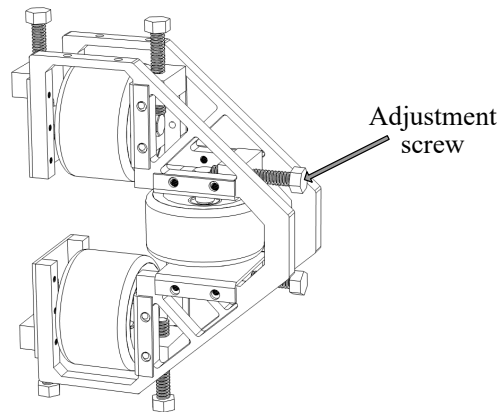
CAD model showing the wheel holder unit. Made with Solid Edge 2020 and Affinity Designer.
